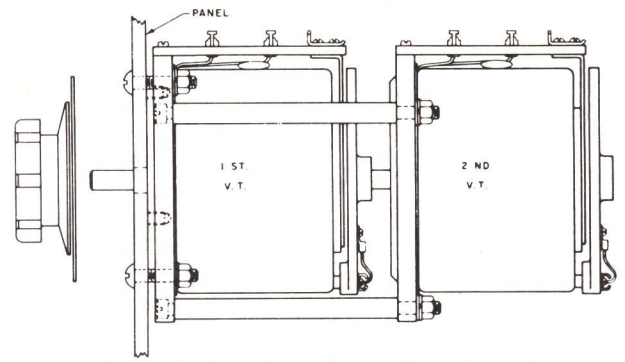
Standard panel mounting, tandem unit. Auxiliary brace is recommended for 3-gang assembly.
